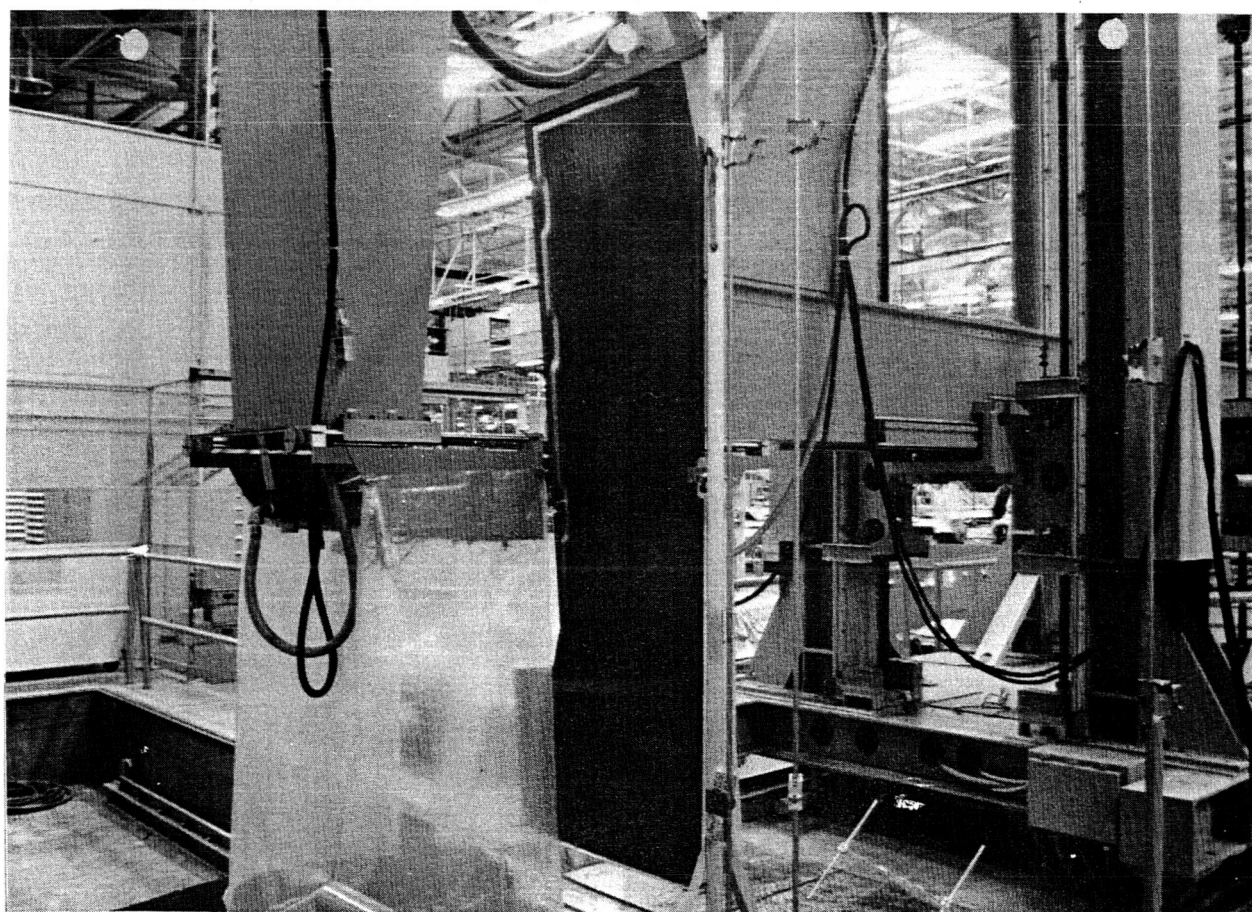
Manufacturing Verification Hardware (Test No. 16) Showing Skin Panel in TTU Inspection
